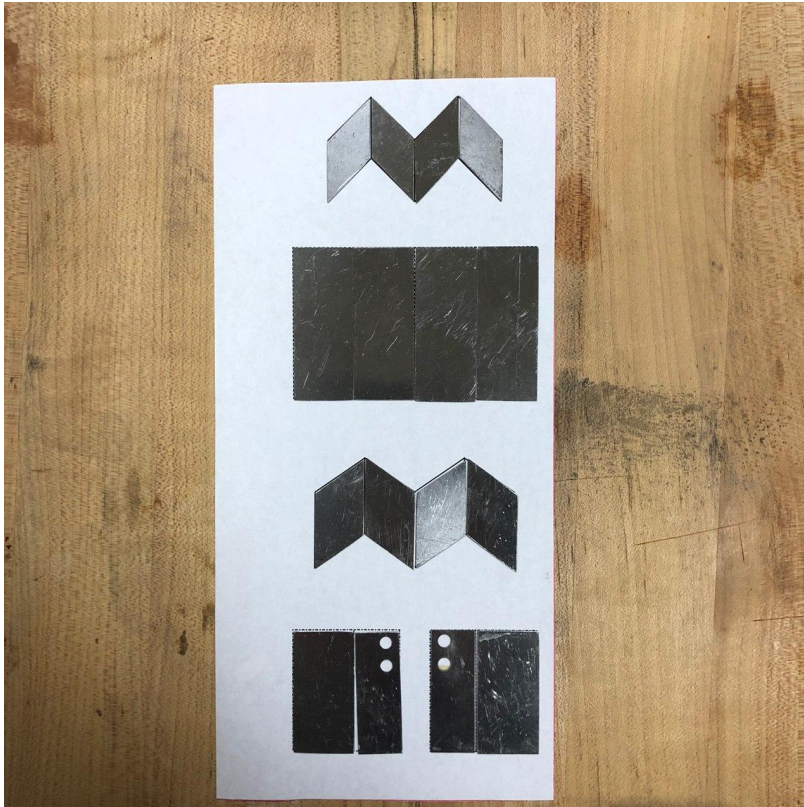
Step 1. The cut parts should be fixed on the proper place on the outline as shown in Figure A.3
